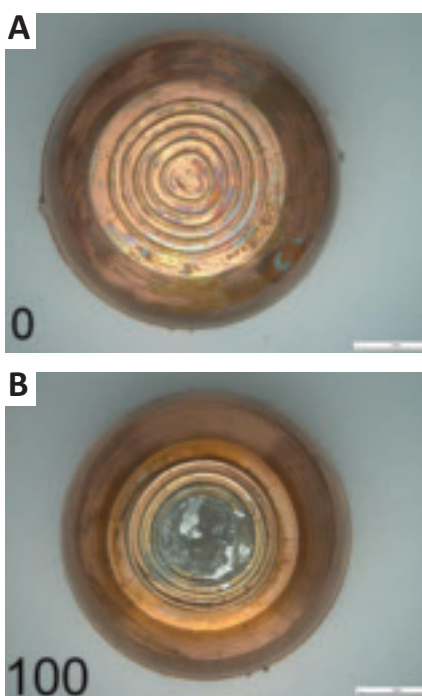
The MRD electrode. A — Freshly dressed; and B — after 100 welds.
